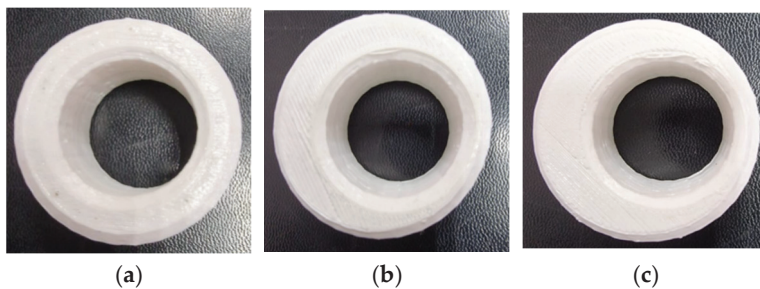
“Turbulizers” with axial deviation of the passage opening (PLA prototypes used in laboratory testing): (a)— 5° ; (b)— 10° ; (c)— 15° .
